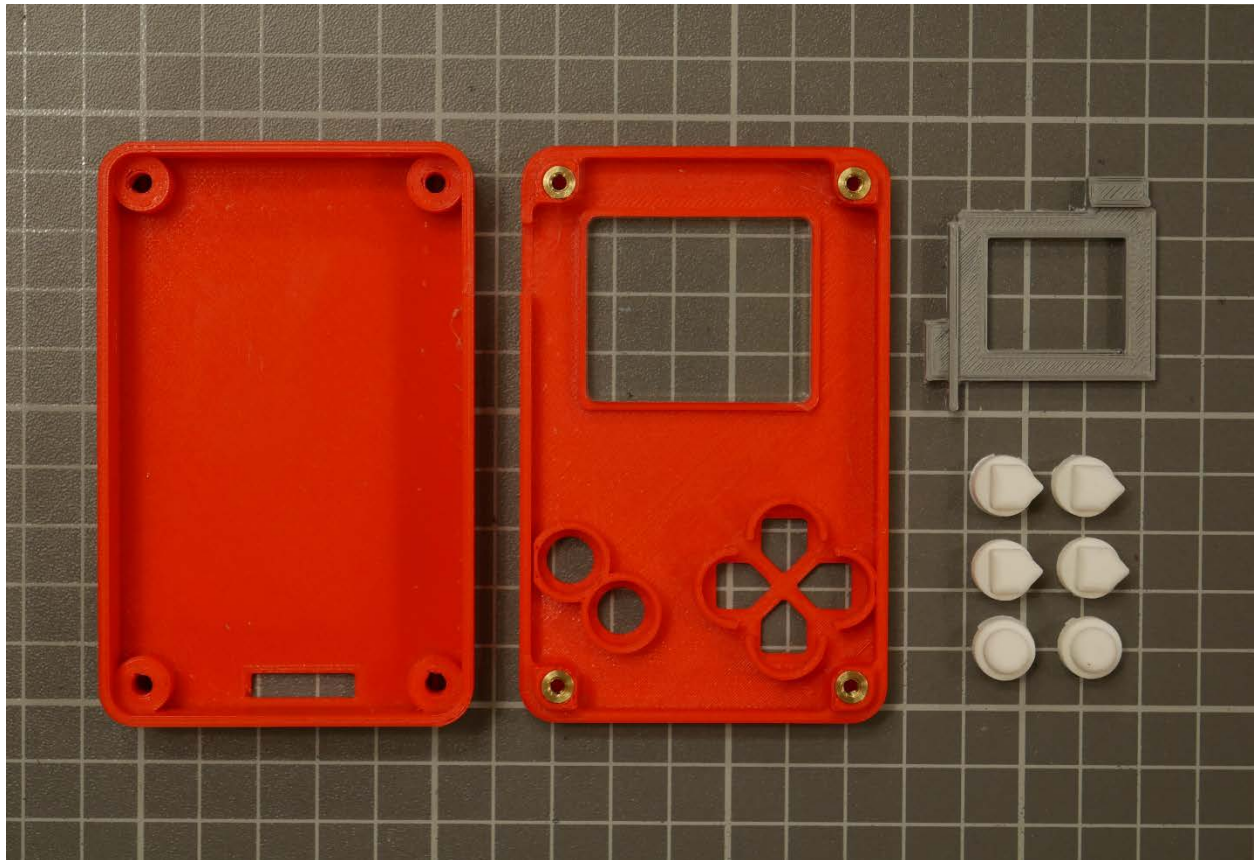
THE 3D PRINTED COMPONENTS OF THE MODULE.
